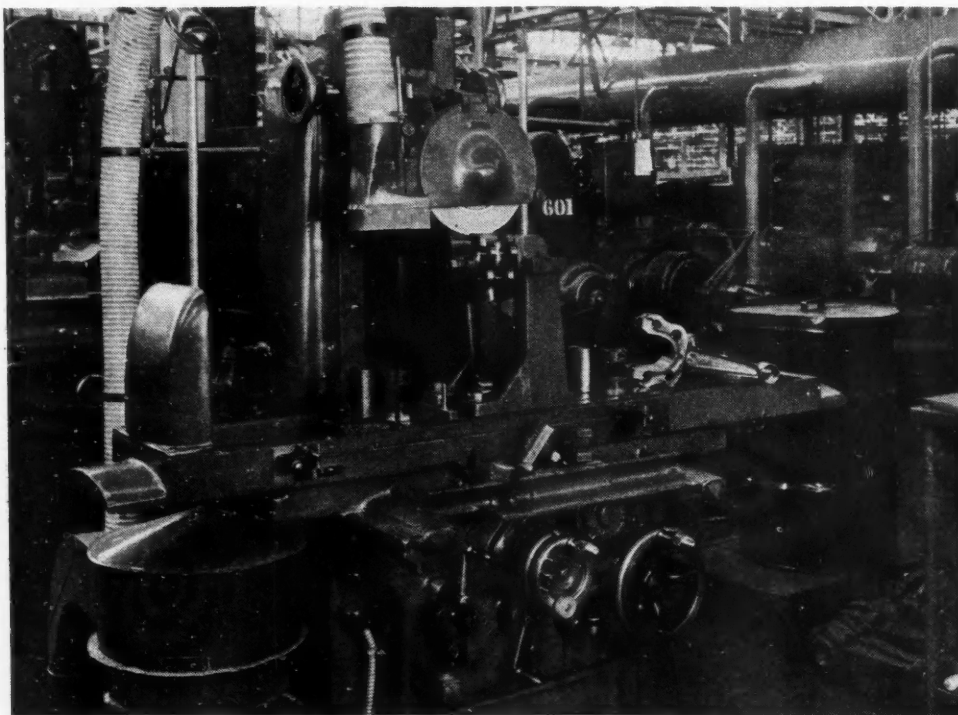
Master rod shown set up on Abrasive machine for operation which grinds the parting surface to mating fit with cap. Ground caps are used as a gage to test mating surface on the rod and no tolerance is allowed on final finish surfaces of either part. The clamping fixture holds the rod against a half plug made in the form of a crank-pin.
